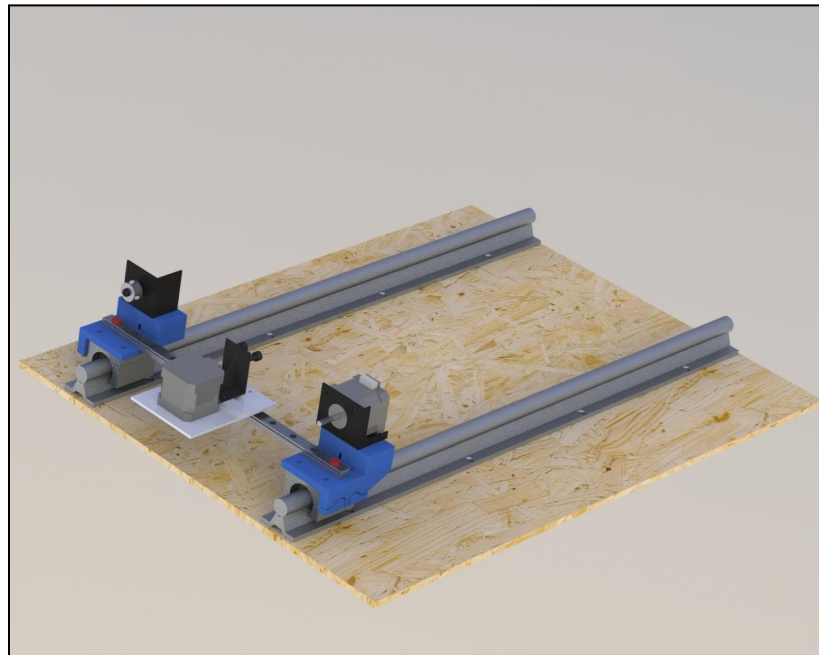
CAD model render of the board, side rails, middle rail, custom parts, and stepper motors.
